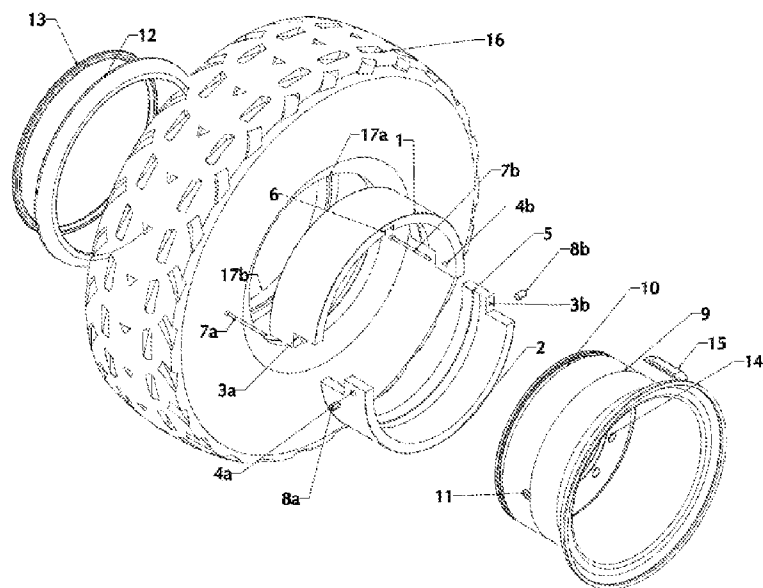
Exploded view of Bead lock wheel assembly for tubeless tire
